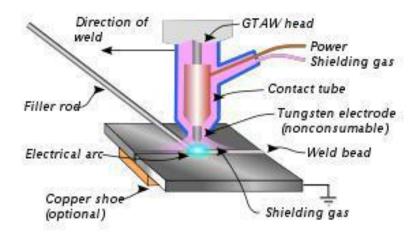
Tungsten inert gas welding process^[31]
